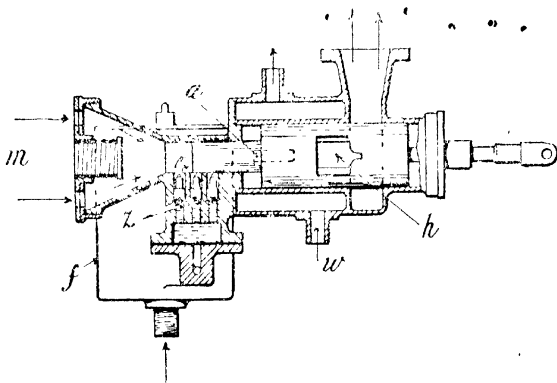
Triple jet carburettor with hollow differential piston air and mixture throttle control—Trier and Martin.
